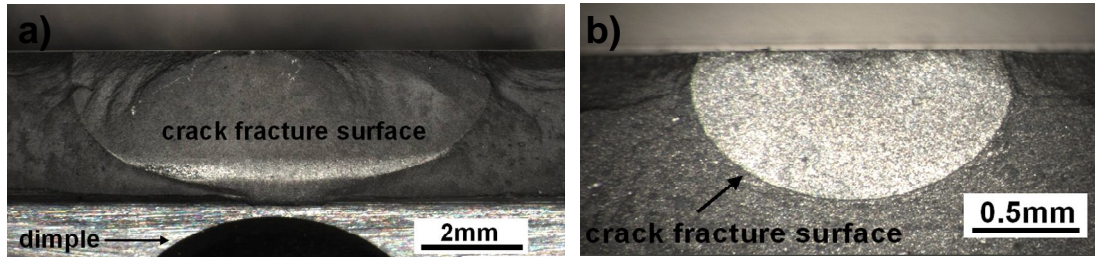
Fracture surfaces of a) a 1.44mm long crack in damaged sample b) a 7.87mm long crack.
